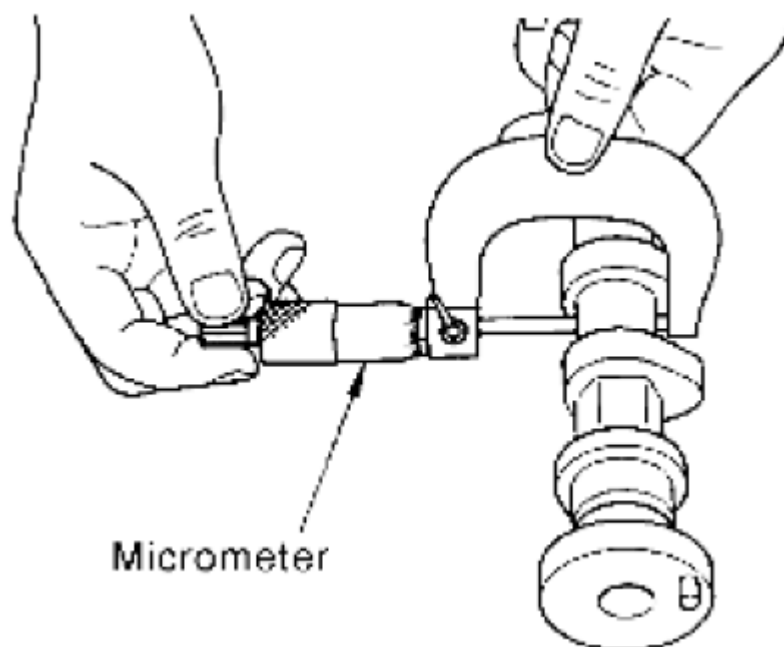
Measuring Outer Diameter Of Camshaft Journal With Micrometer
